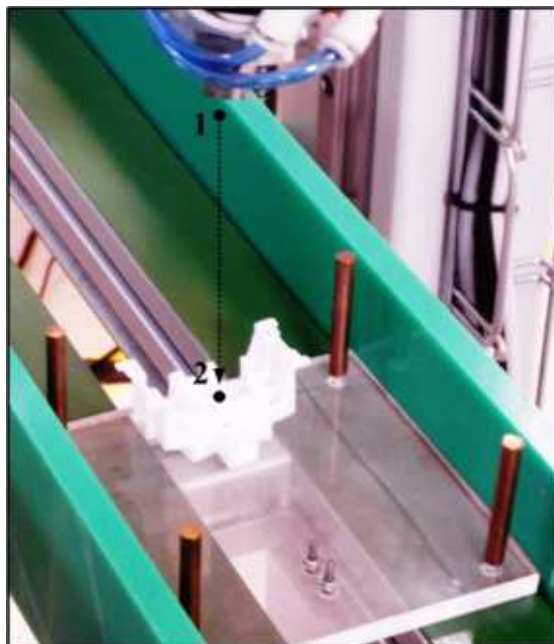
Step 1: fit, transfer and insertion of plastic bearing inserts el. outlet guide pins on the system pallet
